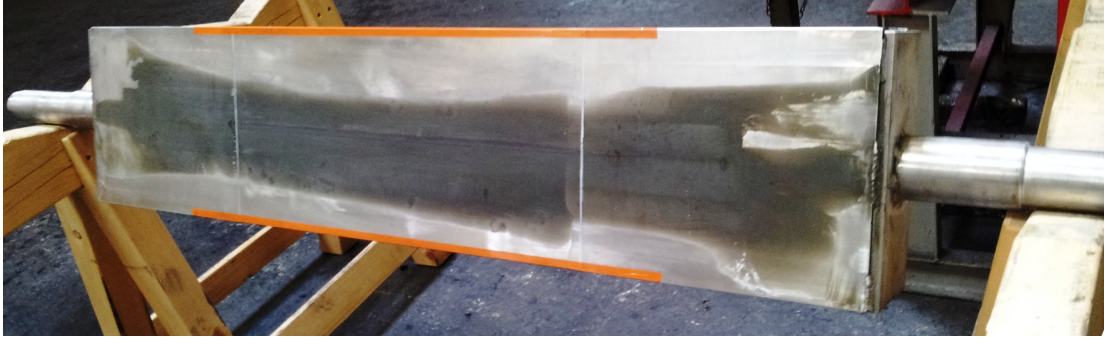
Winding mandrel for plate specimen manufacturing.
